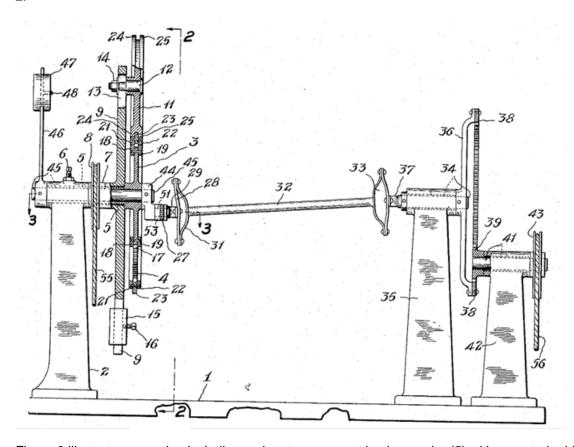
illustrates a gearing including a planetary gear set having carrier (5) with mounted orbital gears (11) interacting with sun gear (3). The gearing further includes universal joints (28), (33) attached to the output of the planetary gear set.
